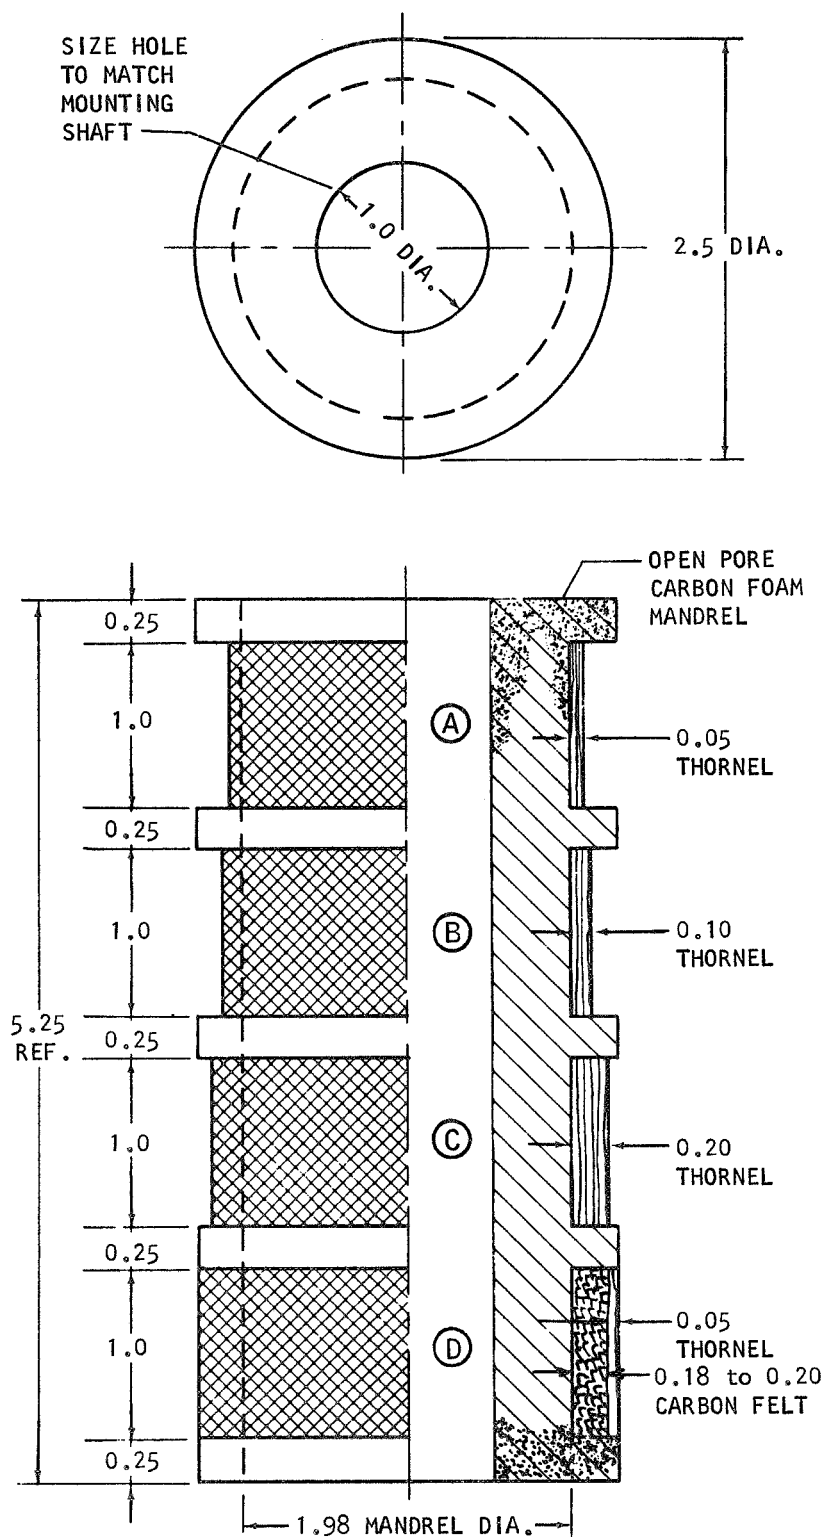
Dimensions of PG/Thornel Test Sample Spool
